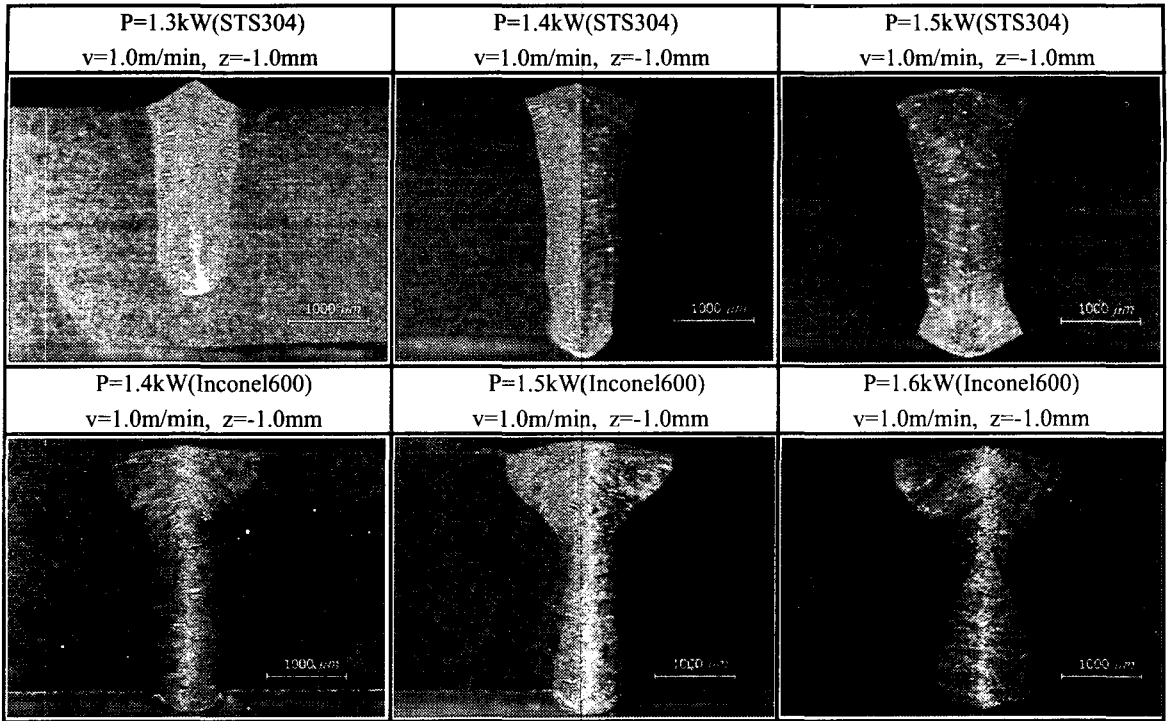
Welding Cross-section according to the laser beam power(STS304, Inconel 600)
